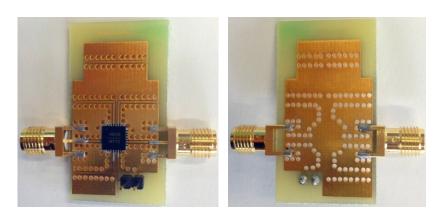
Photo of the Fabricated Standard Evaluation PCB for HMC928LP5E MMIC
